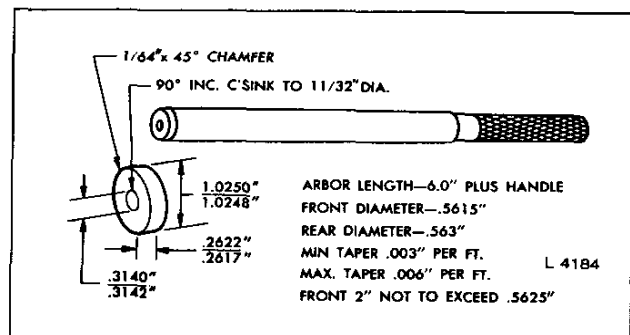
Fabrication of Governor Housing-to-Base Alignment Tool
